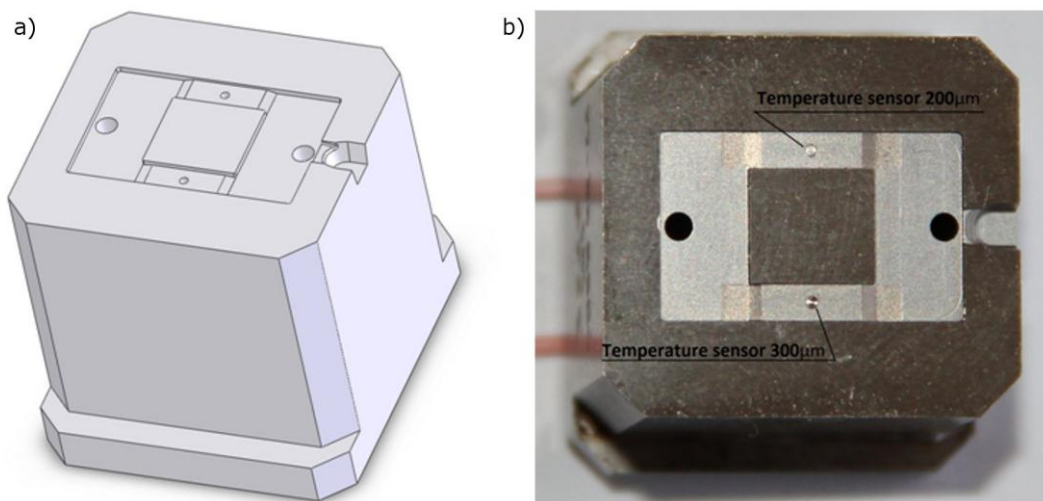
a) CAD model of the interchangeable mould insert with machined micro impression; b) mould insert with the micro temperature sensors
